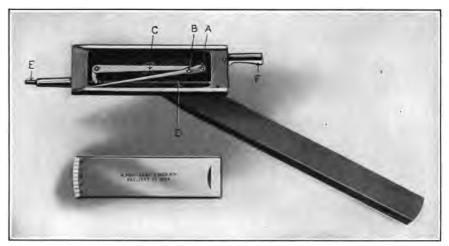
TEST INDICATOR WITH COVER PLATE REMOVED
